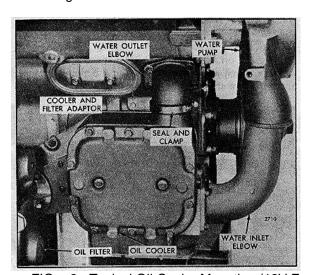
Typical Oil Cooler Mounting (12V Engine)
